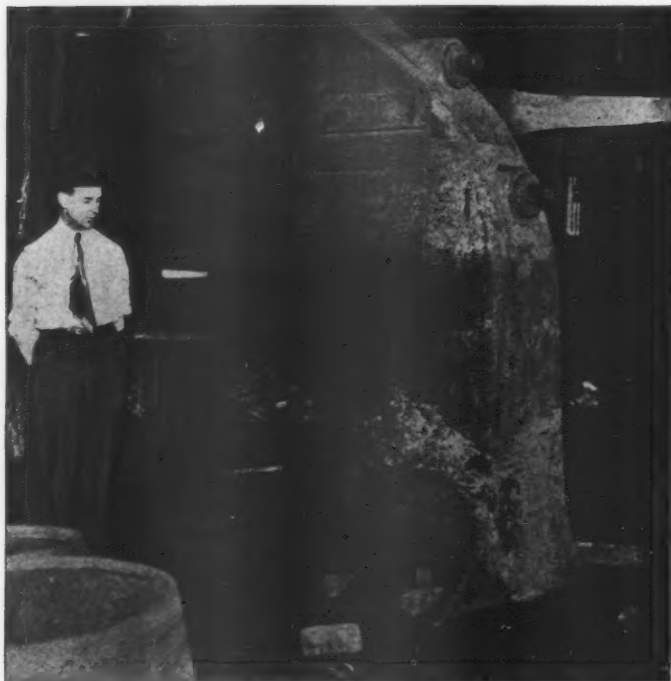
A MORE DETAILED VIEW OF THE WELDED LEG
